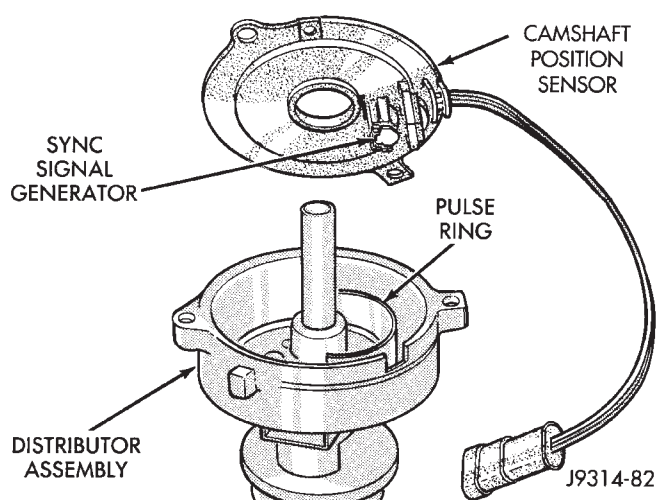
Camshaft Position Sensor—Typical (5.2L Distributor Shown)
